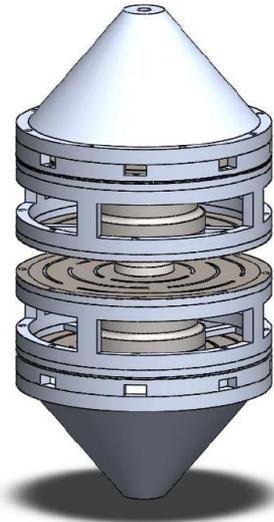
Preliminary design of the 2-collinear-DoF strut prototype.
